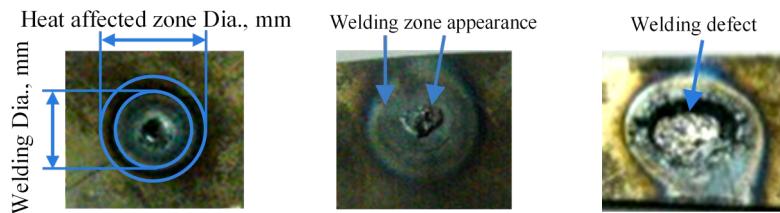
Specific zones of the spot welded joint: the welded zone (fused core), the heat affected zone around the molten core and a weld defect
